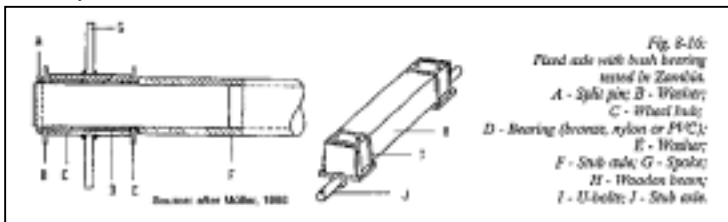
Fixed axle with bush bearing tested in Zambia.
